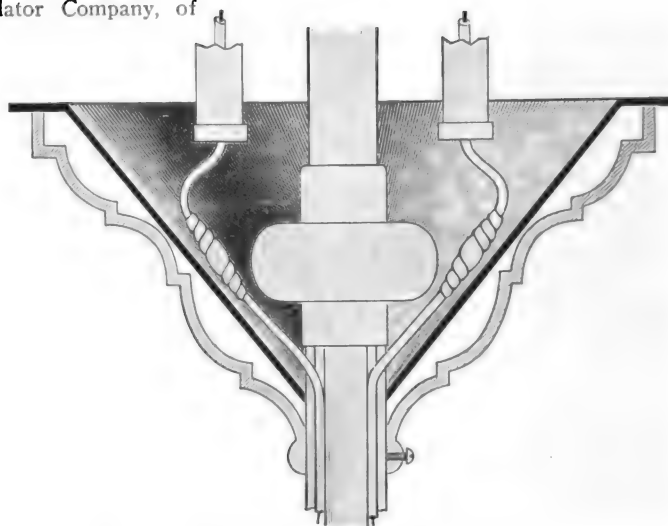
MICANITE INSULATOR IN PLACE IN FIXTURE.
